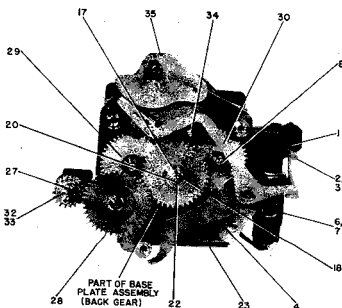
Front View, C57 Clocks—Front Plate Removed
